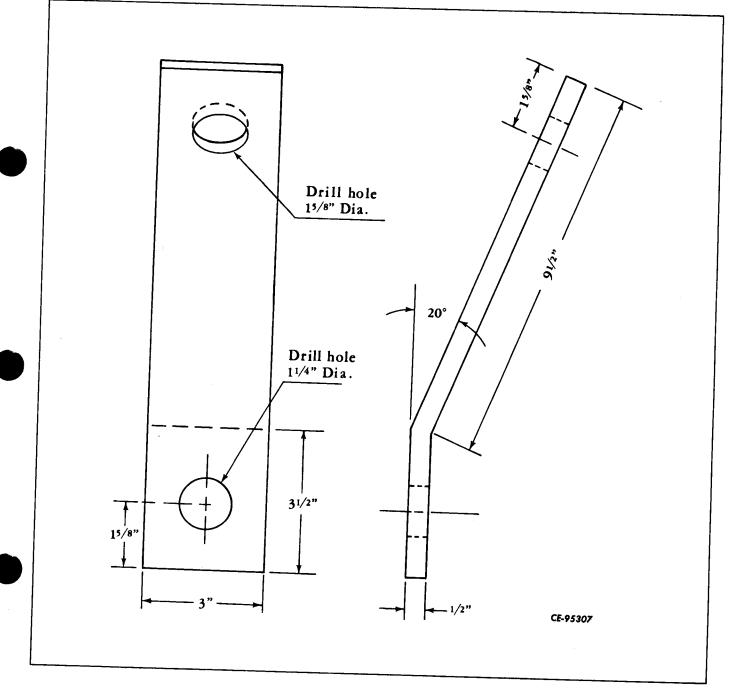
Item V. Slide-Stand Weldment (Left Hand).
